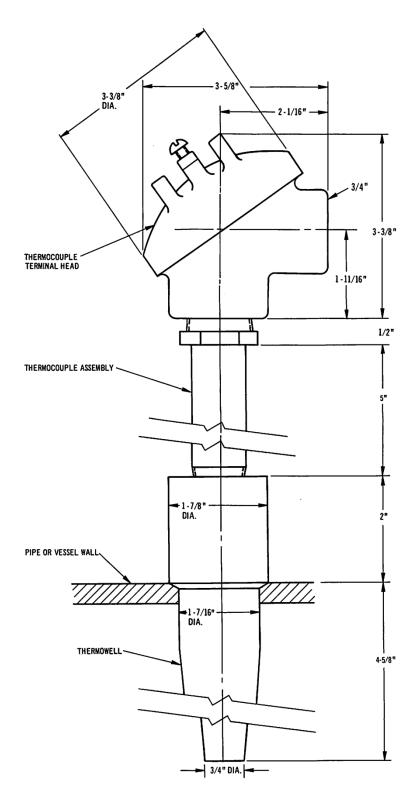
Figure 6.9-6 Typical Thermowell Type Thermocouple Mounting [Vol. II, Chapter 6, p.6.9-10]
